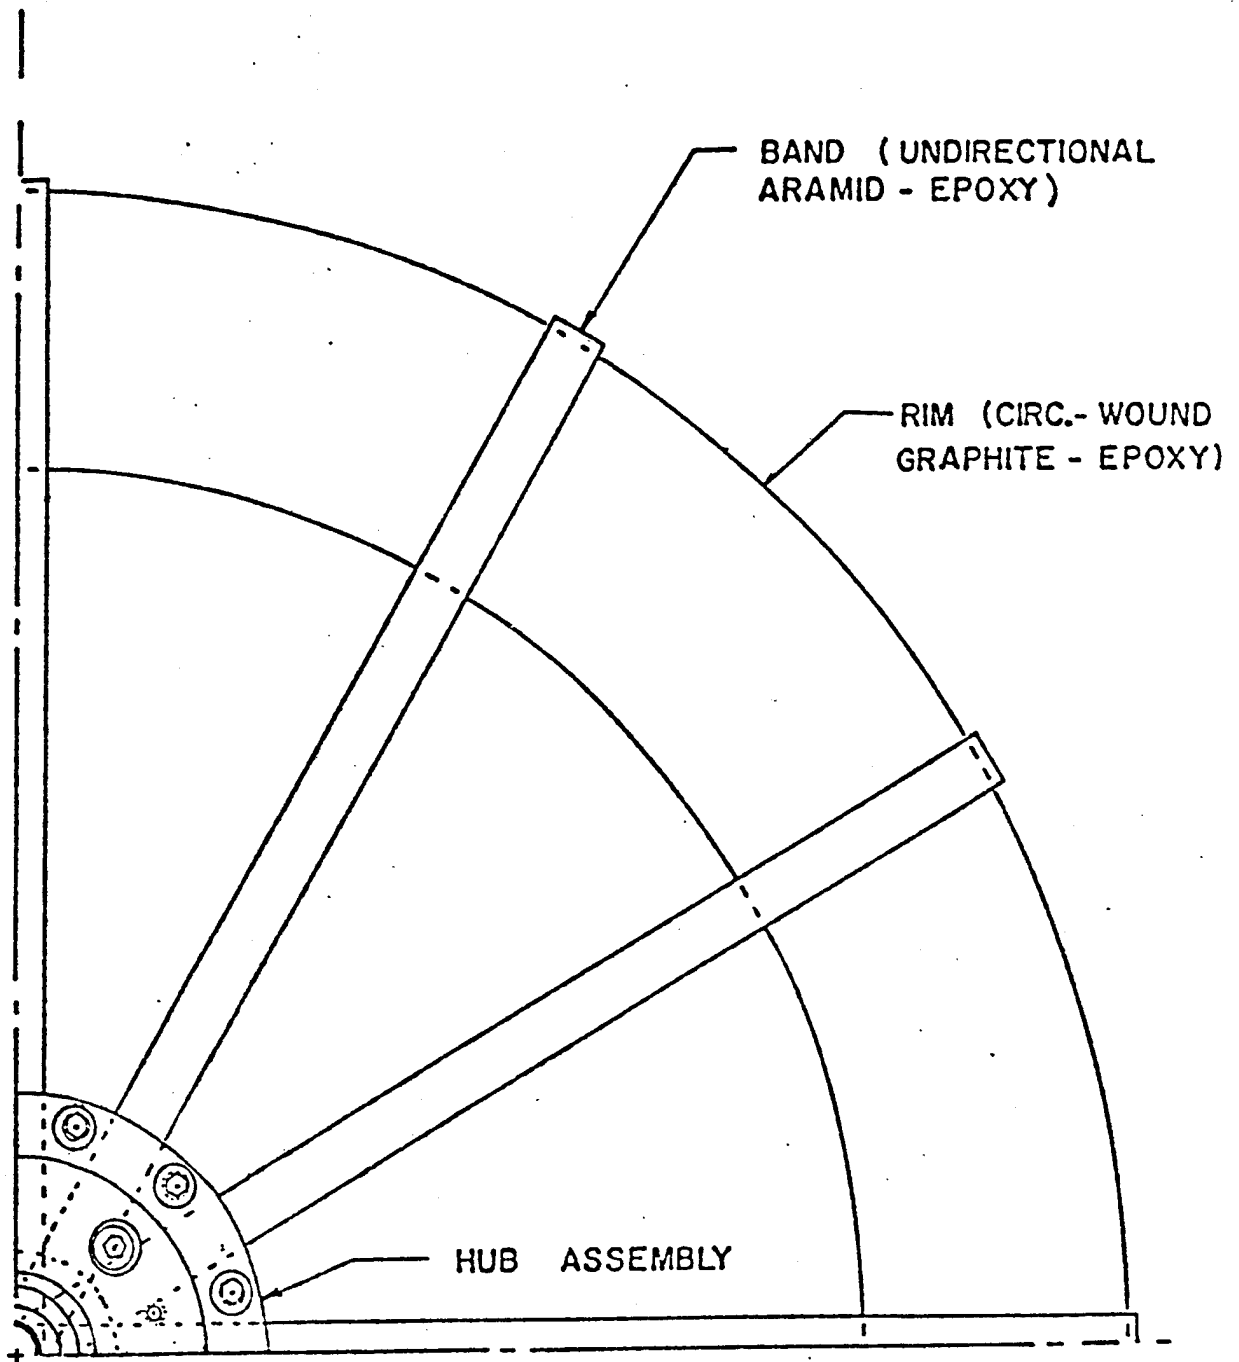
Plan view of one quarter of the Sandia thick-ring flywheel (System A).
